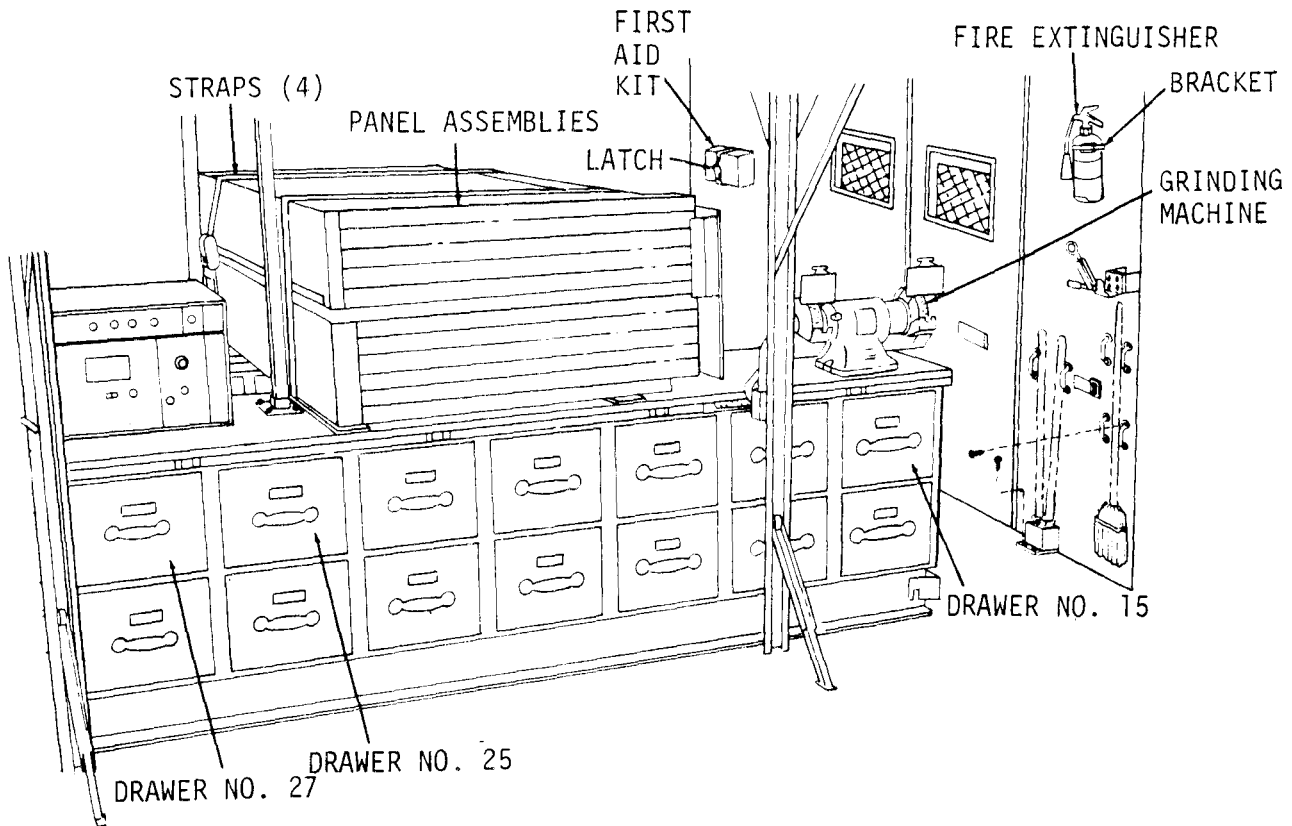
Utility Grinding Machine, Workbench and Panel Assembly.
